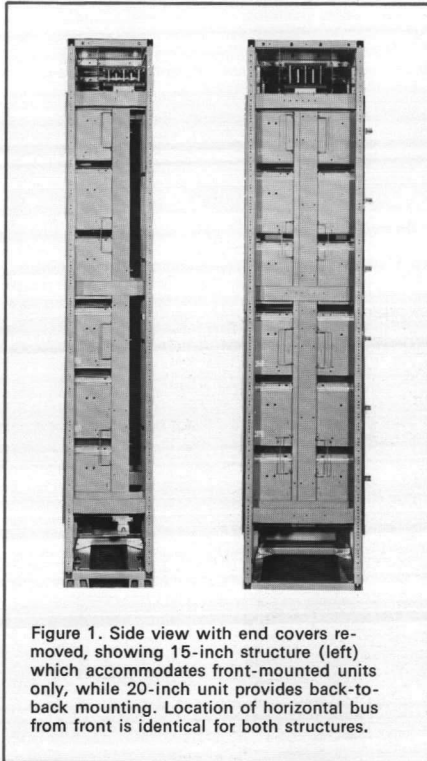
Side view with end covers removed, showing 15-inch structure (left) which accommodates front-mounted units only, while 20-inch unit provides back-to-back mounting. Location of horizontal bus from front is identical for both structures.
